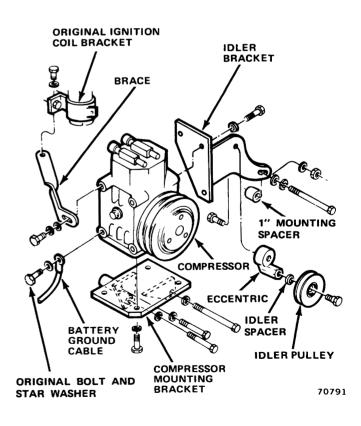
Compressor Mounting—1976-79 Eight-Cylinder Engine
